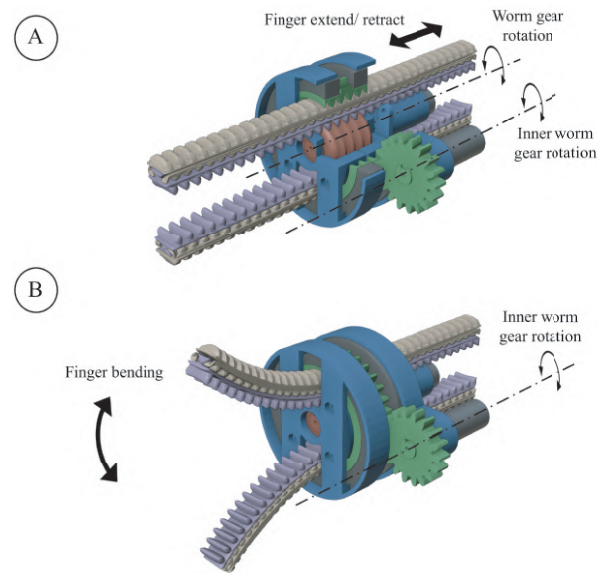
Finger actuation mechanism. A) Finger extension and retraction. B) Finger bending.
